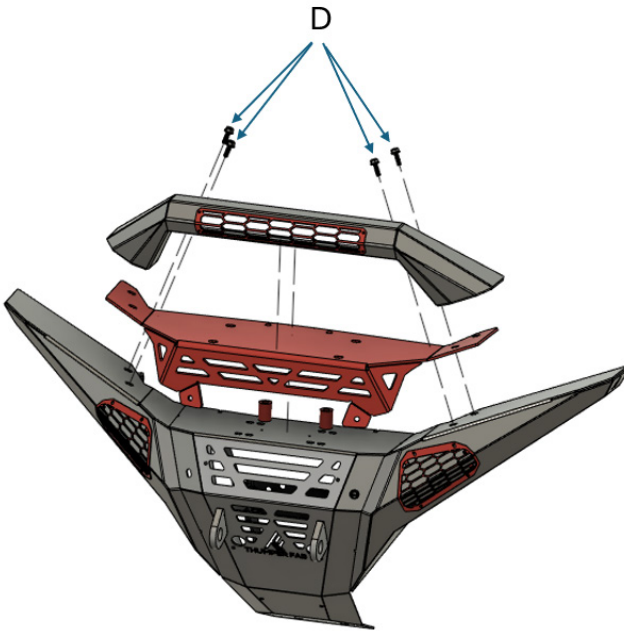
Mount the Bumper Body to the Upper Mount Brackets using a 13mm Socket. Tighten all remaining hardware evenly
